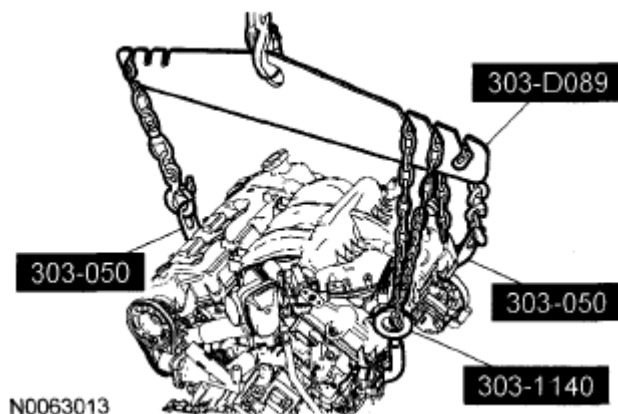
Identifying Spreader Bar, Engine Lifting Brackets, Engine Lifting Bracket Set And Suitable Engine Crane
